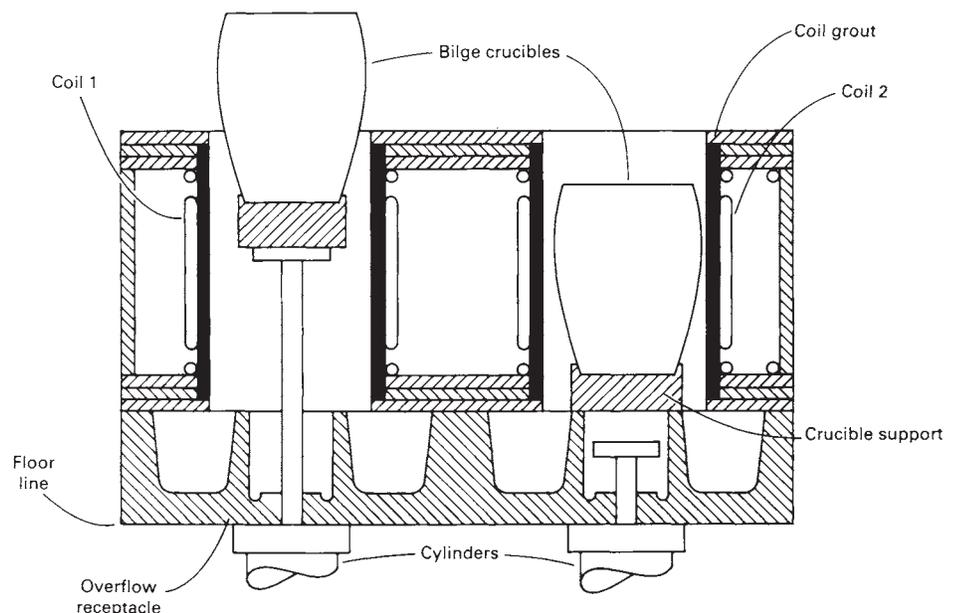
Cross section of a double push-out furnace. Bilge crucibles are placed on refractory pedestals and raised and lowered into position within the coils by hydraulic cylinders.
